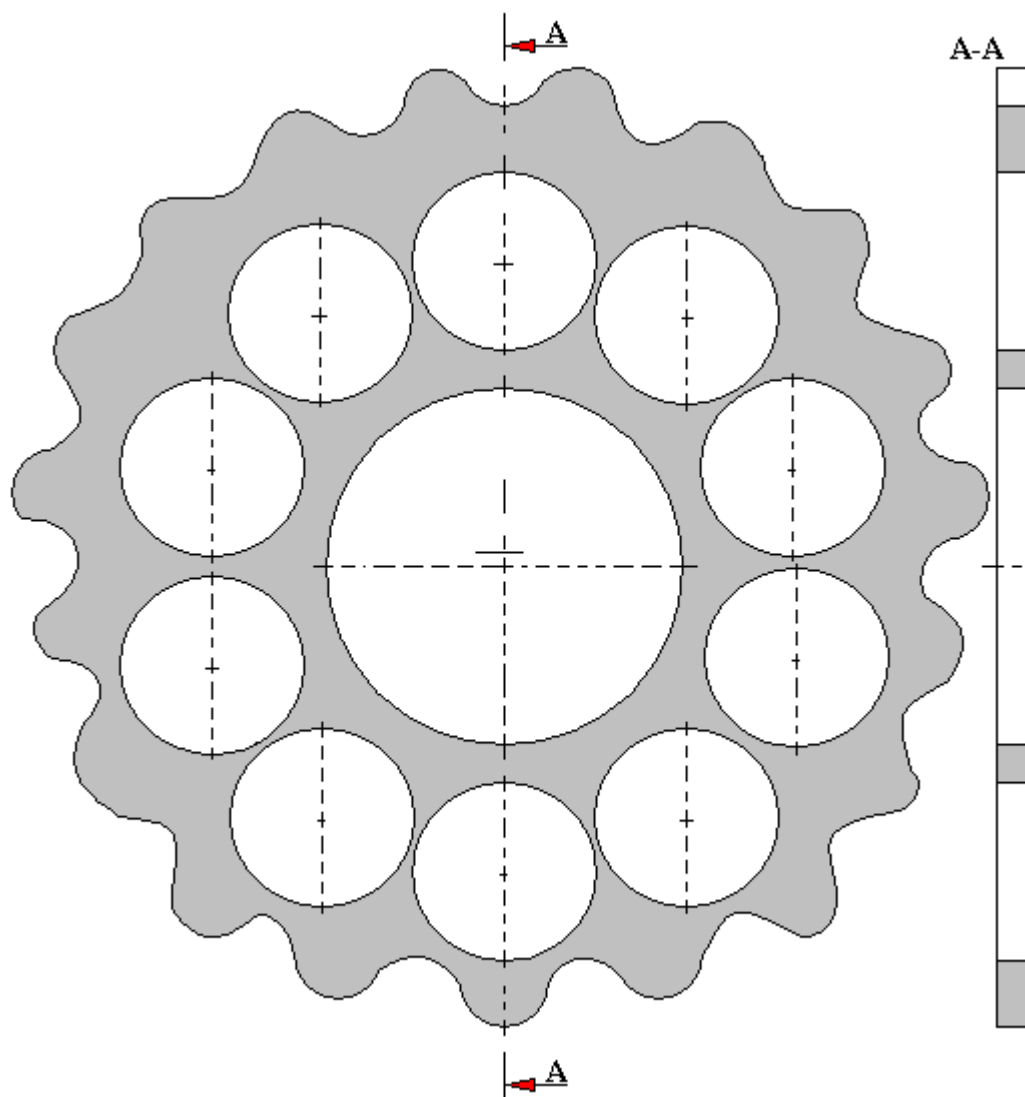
A design of the standard planet gear of a cycloidal gear
